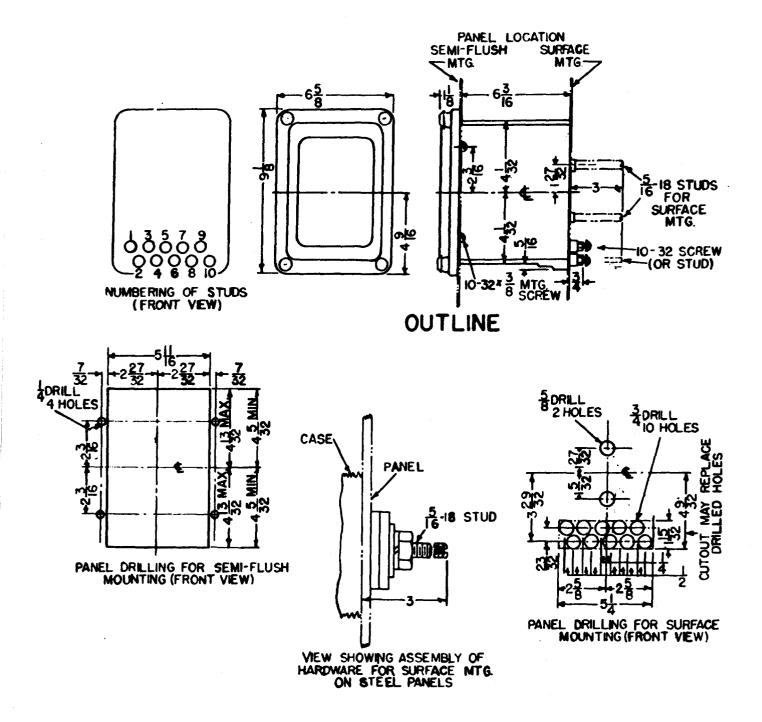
(K-6209271-3) Outline And Panel Drilling Dimension Diagram
